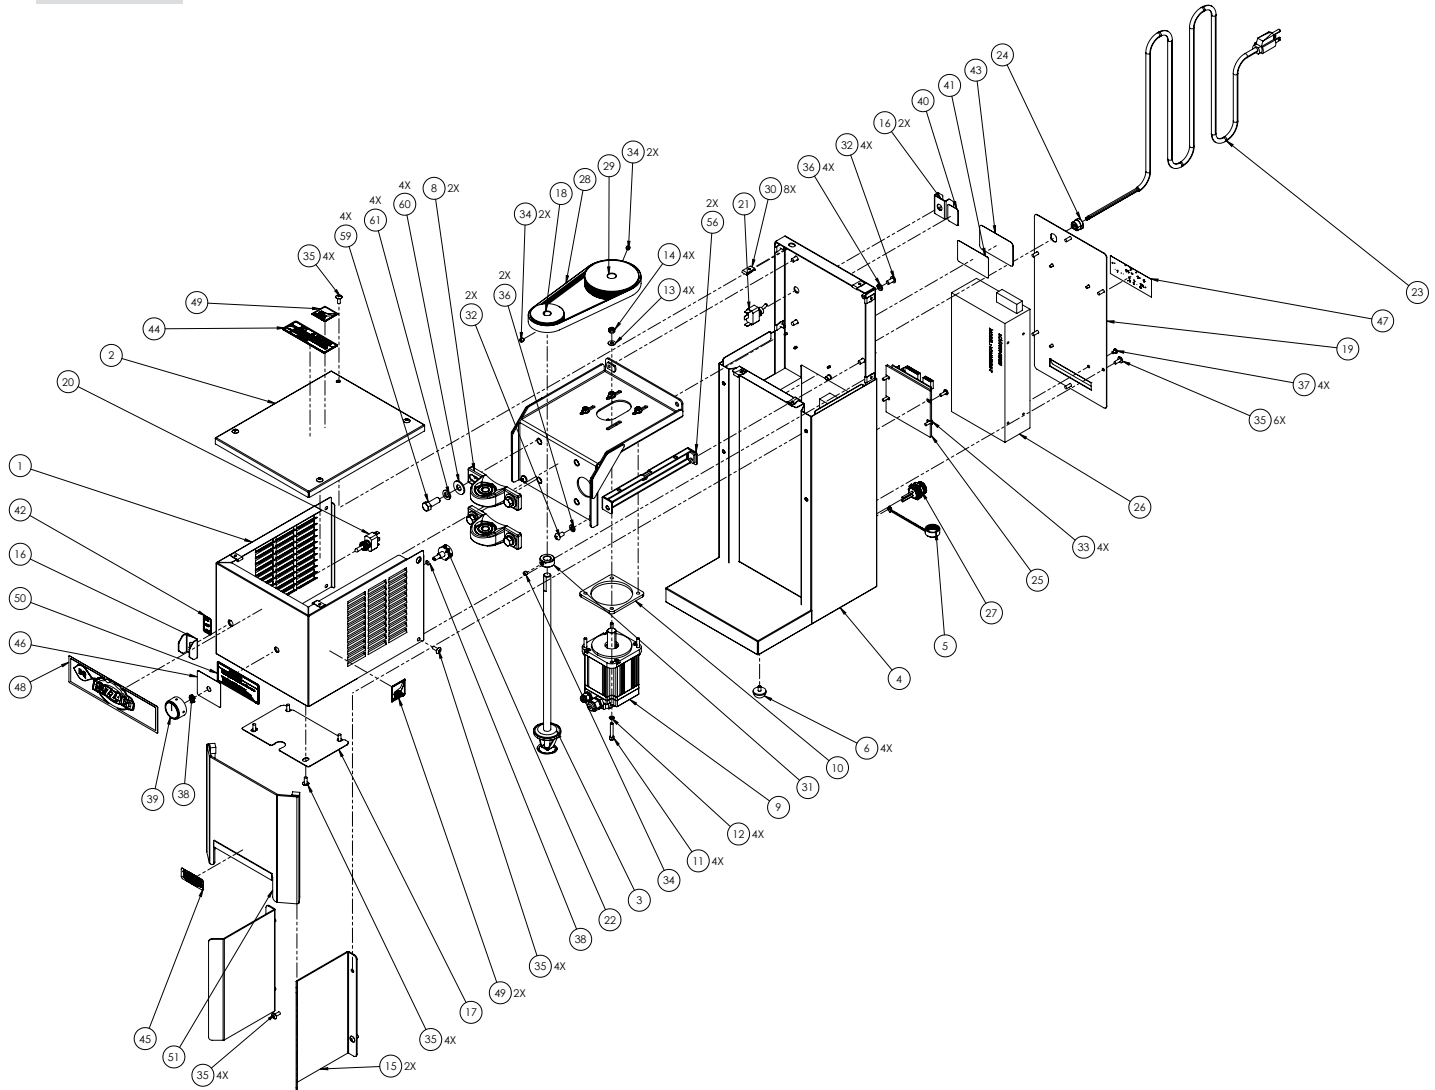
Blizzard® Machine Assembly (Sheet 2 of 5)
